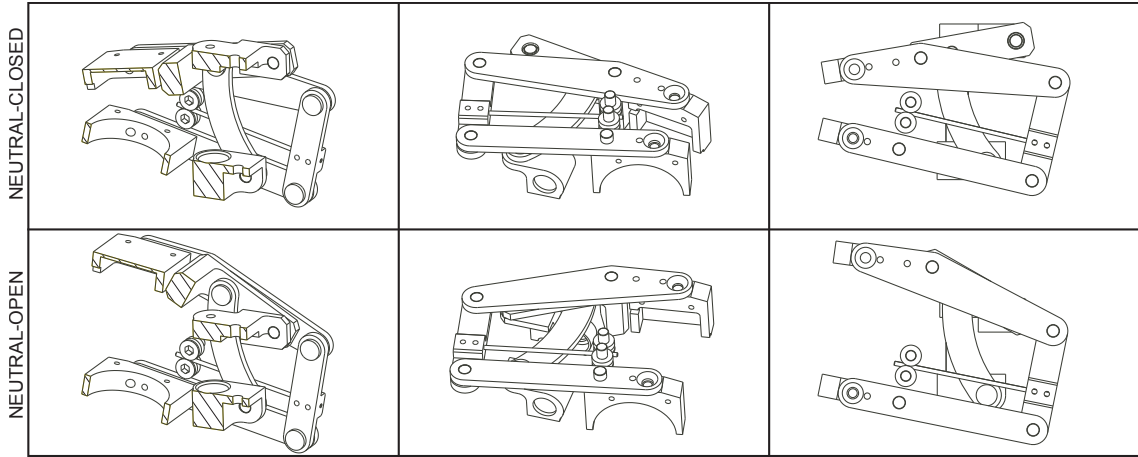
Sections and side views of the fingers assembly mechanism without finger plates (4-bar in neutral configuration; 5-bar in open and closed configuration)
